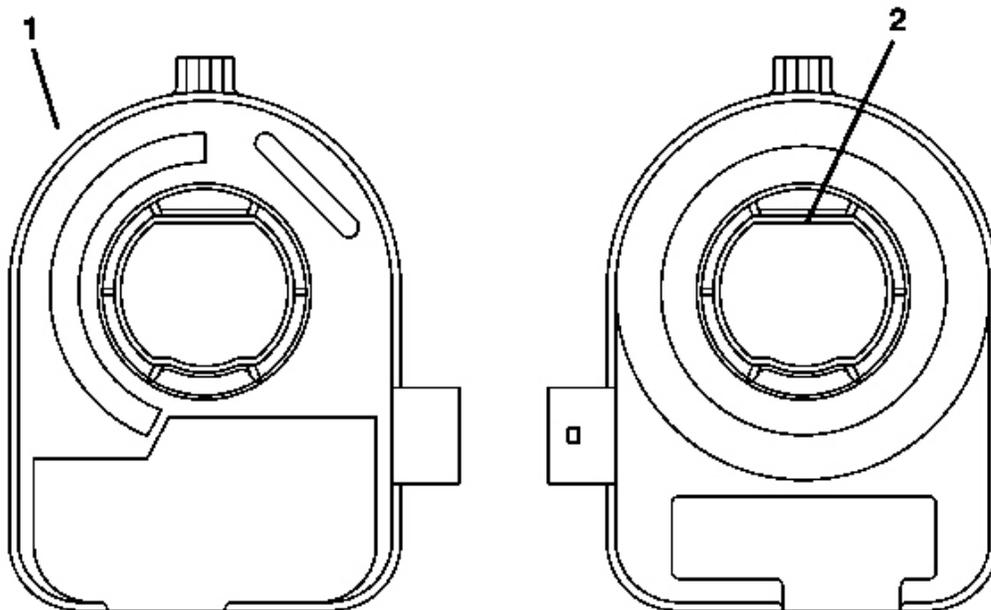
Steering Wheel Position Sensor Rotor Flange Cuff, Centering Pin Hole, Alignment Mark And Foam Ring
